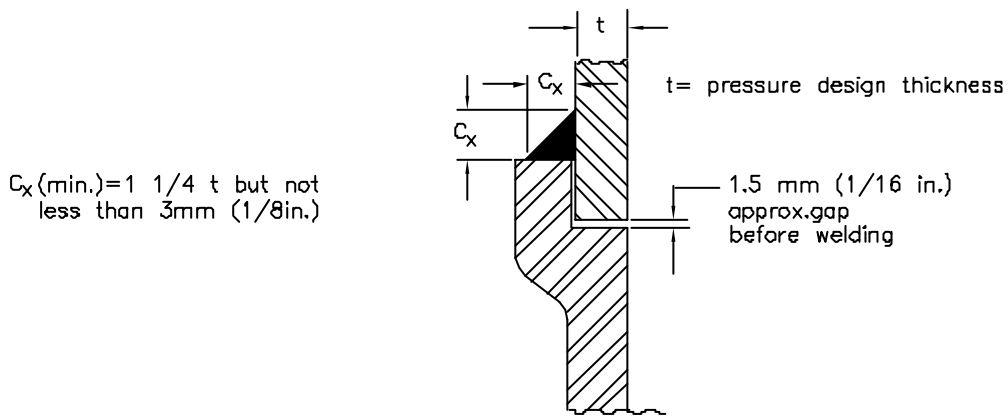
C MINIMUM WELDING DIMENSIONS FOR SOCKET WELDING COMPONENTS
